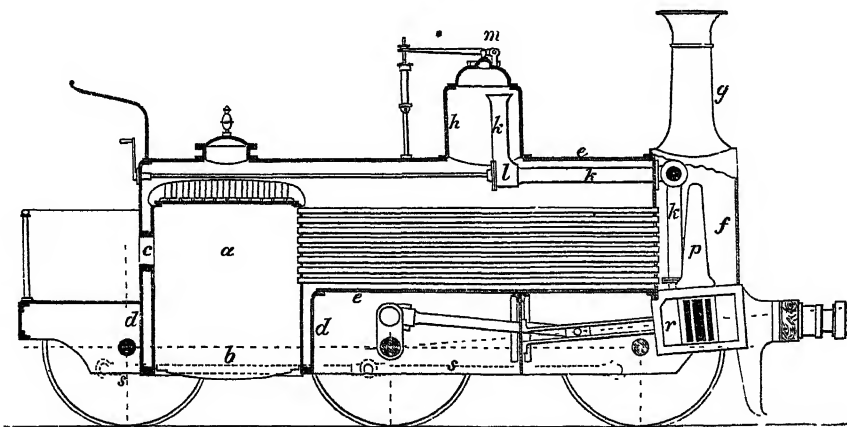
Section of a Simple 'Inside-cylinder' Goods Locomotive.
